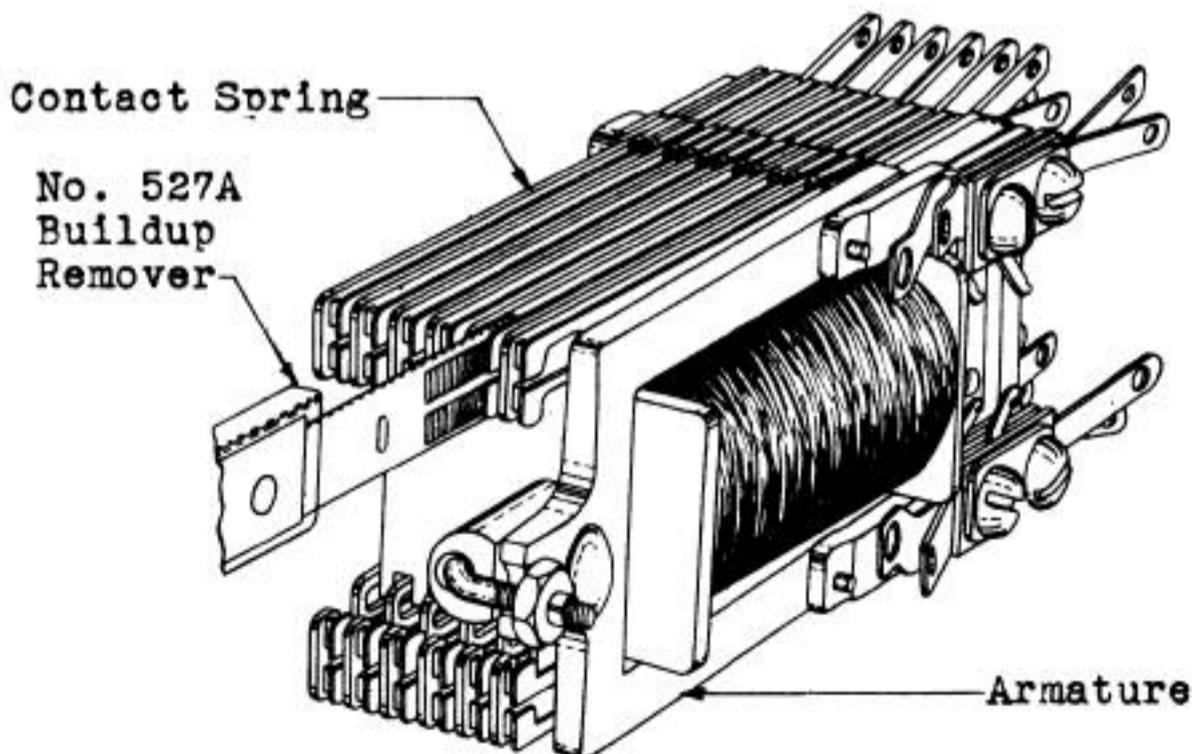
Method of Removing Buildups from U & Y Type Relay Contacts
